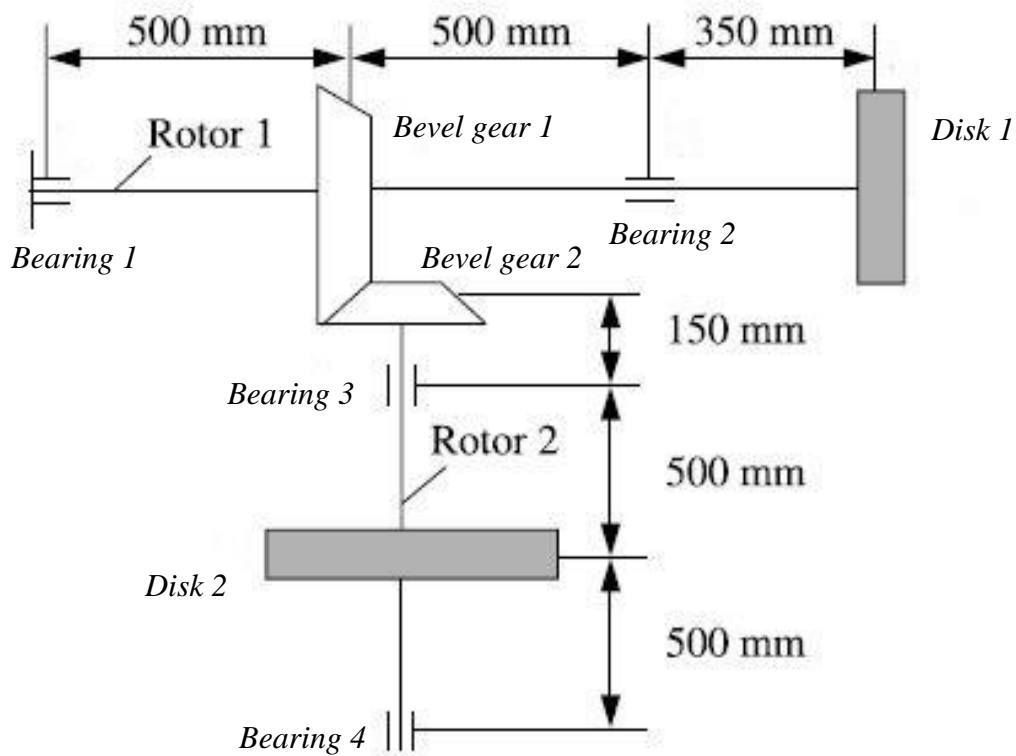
A Rotor-Bearing System Geared by Bevel Gear (M. Li (2001))
